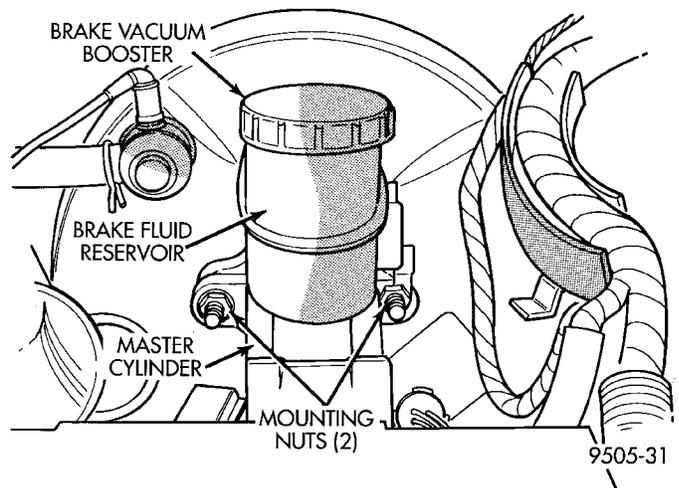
Master Cylinder Mounting To Vacuum Booster
